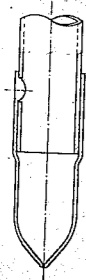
Rubber drain valve fitted to the bottom of the oil breather pipe.
